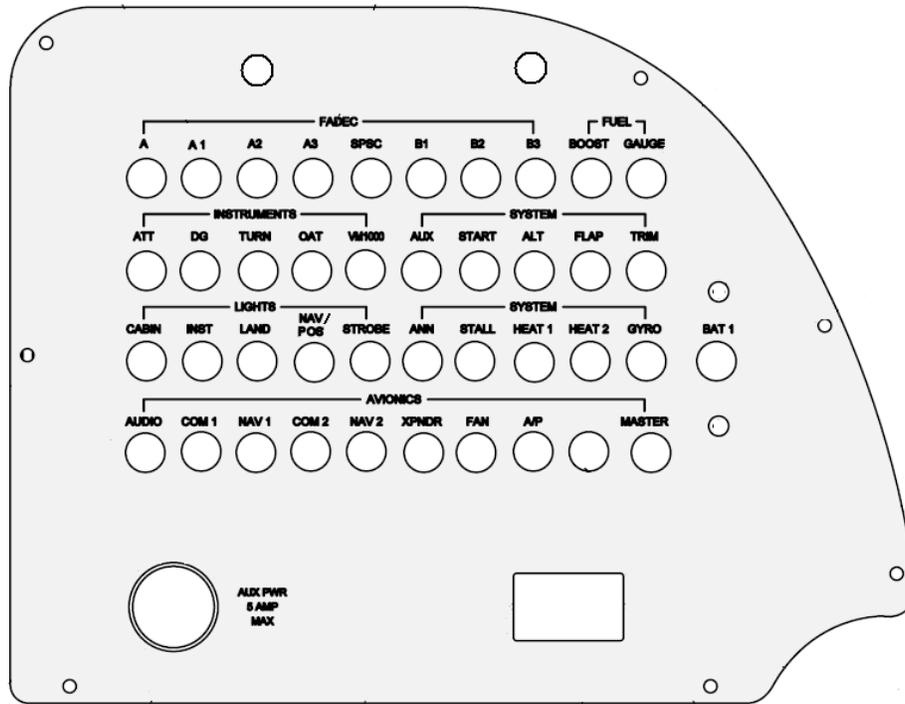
Placard for the CB (Circuit Breaker) Panel P/N 135A-80-303
